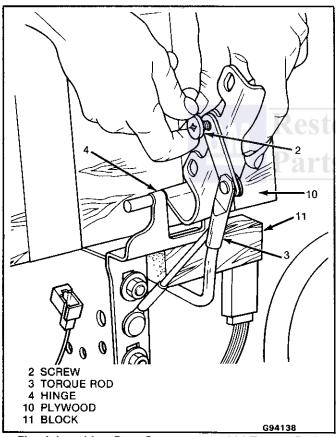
Attaching Rear Compartment Lid Torque Rod
